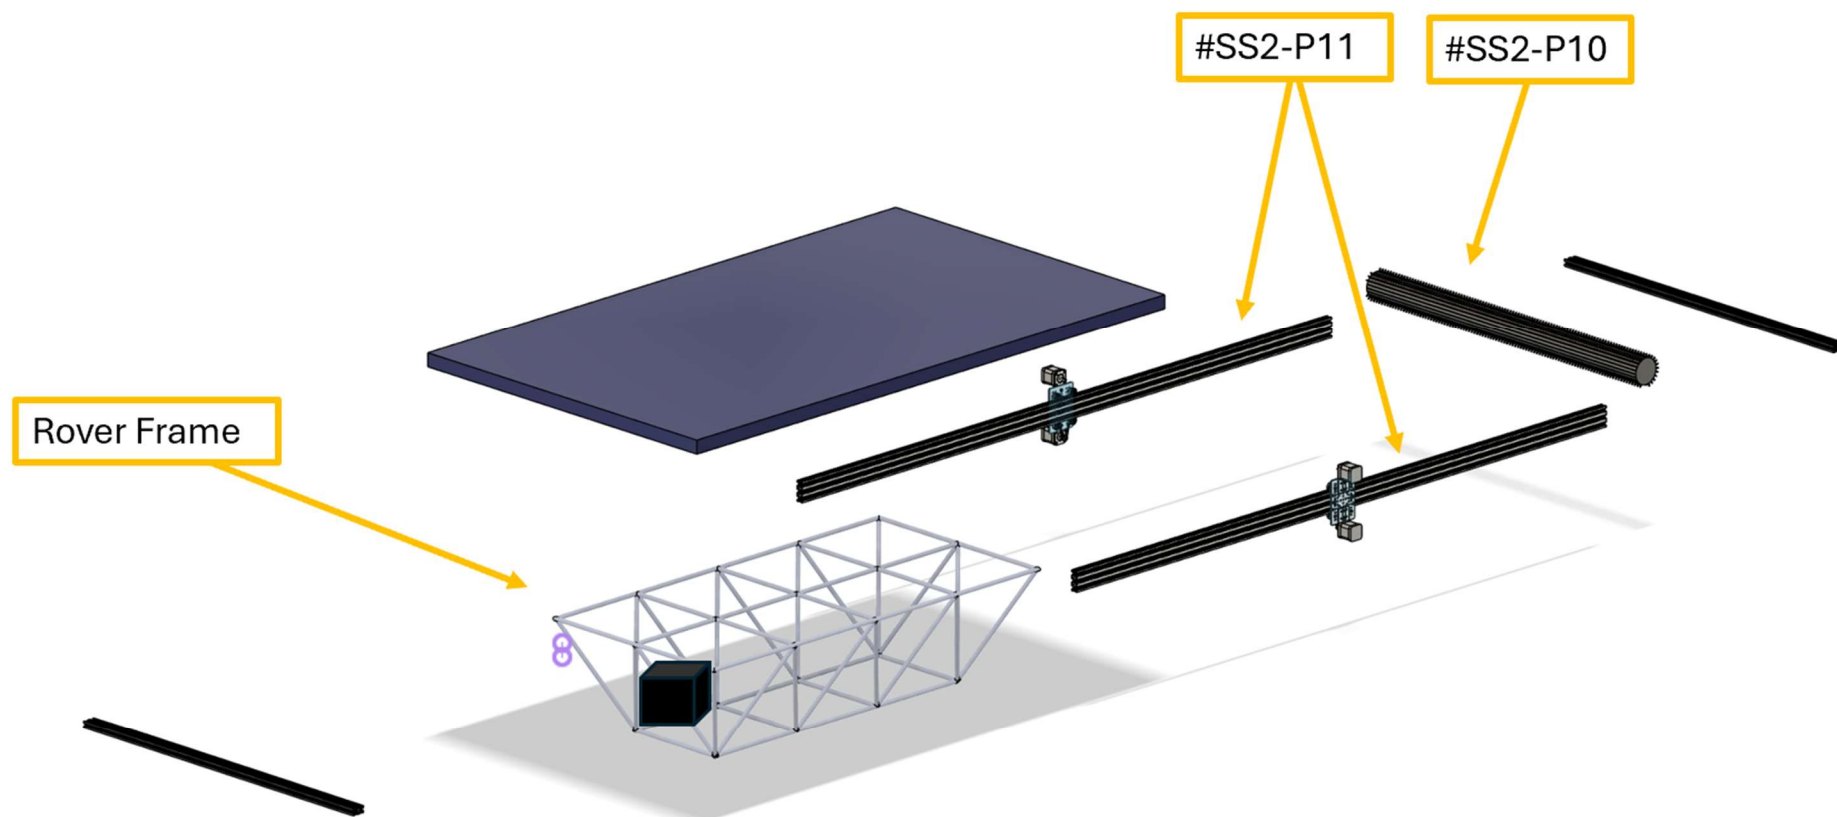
Exploded View Assembly Drawing of Sub-System SS#2 – Cleaning System
